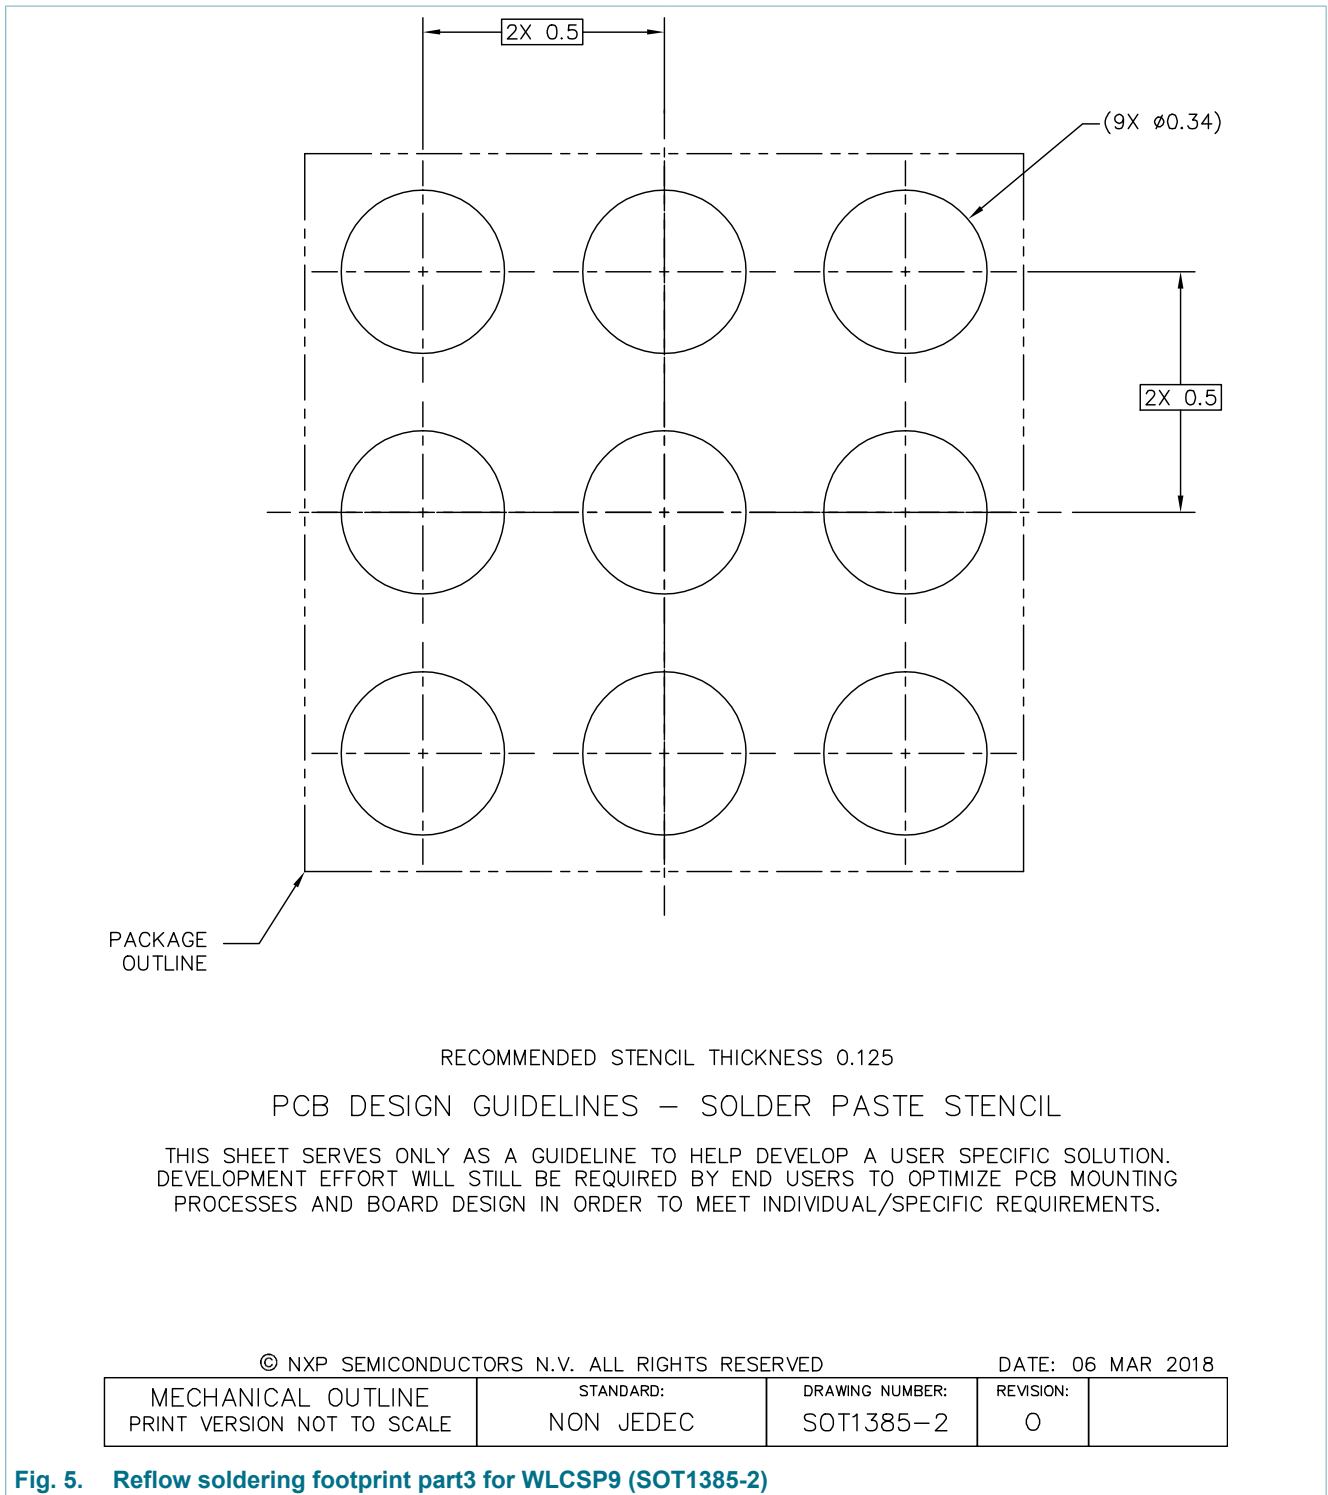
Reflow soldering footprint part3 for WLCSP9 (SOT1385-2)
